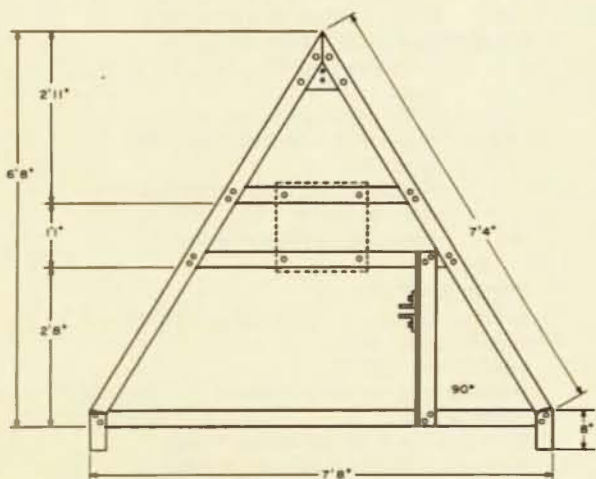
(a). Top view of the A-frame assembly. The dotted line is the location of the pivot frame mounting surface.
